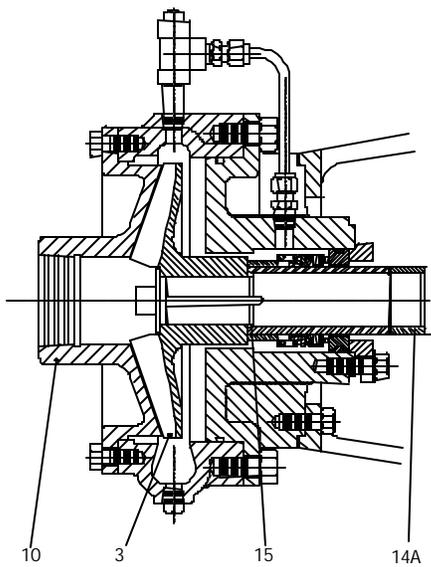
Sectional for Frame -Mounted L&H Horizontal on JP Shaft
